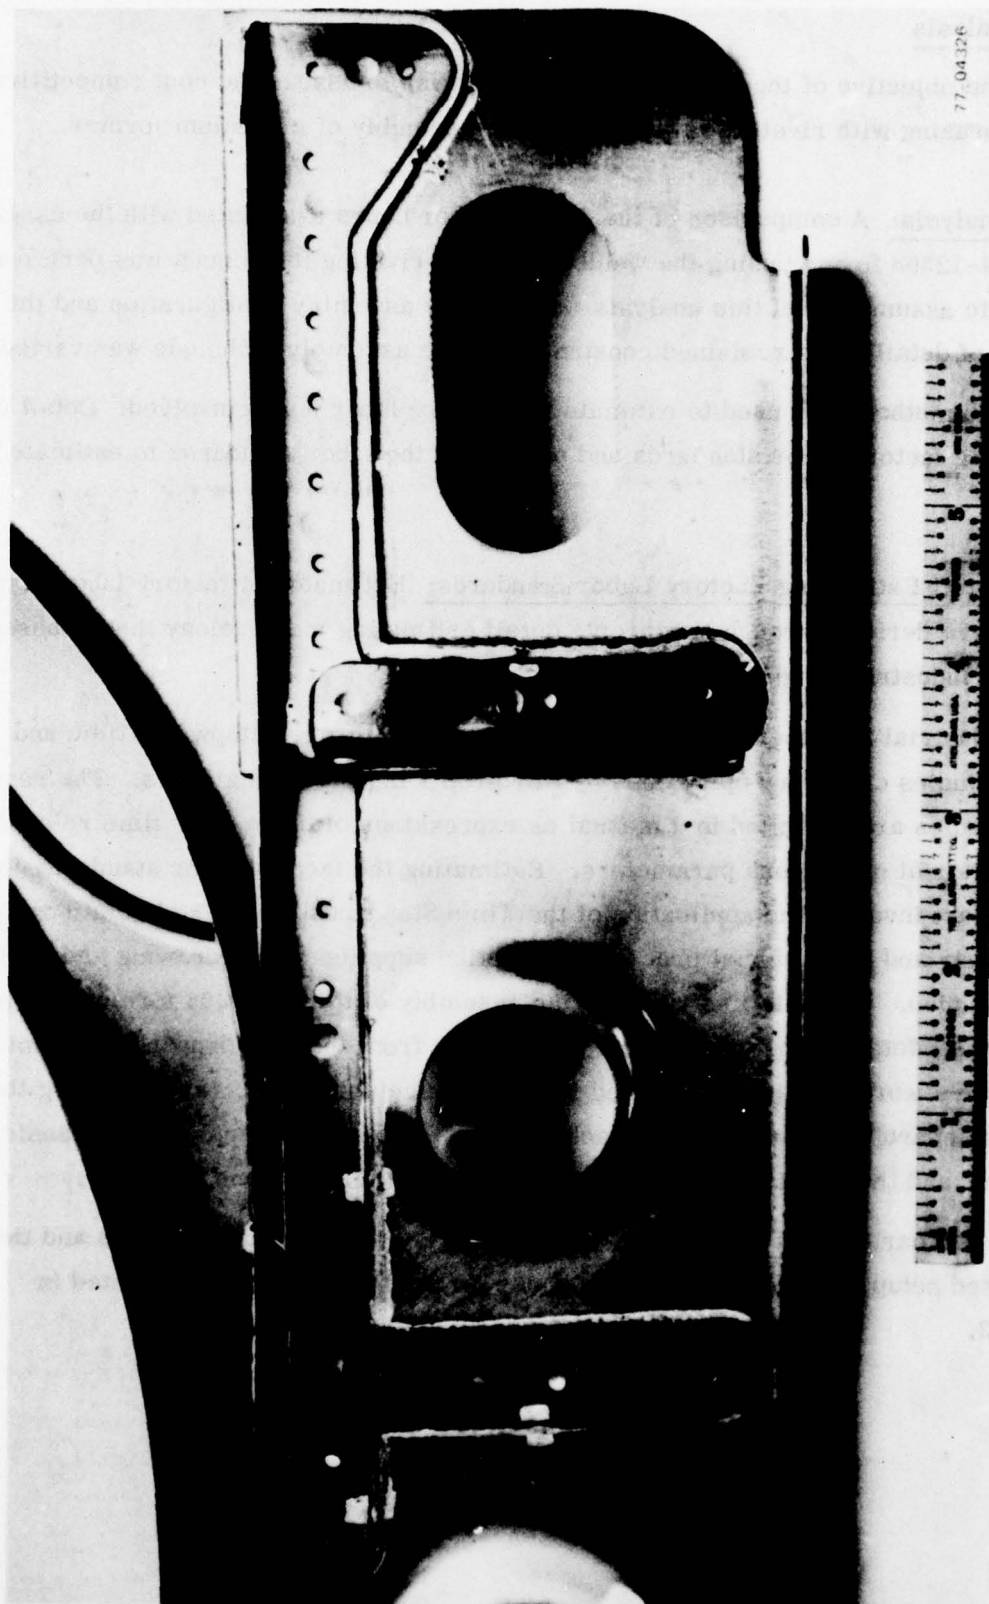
WELDBRAZED TI-6Al-4V FORMER HALF SECTION - BACK SURFACE
